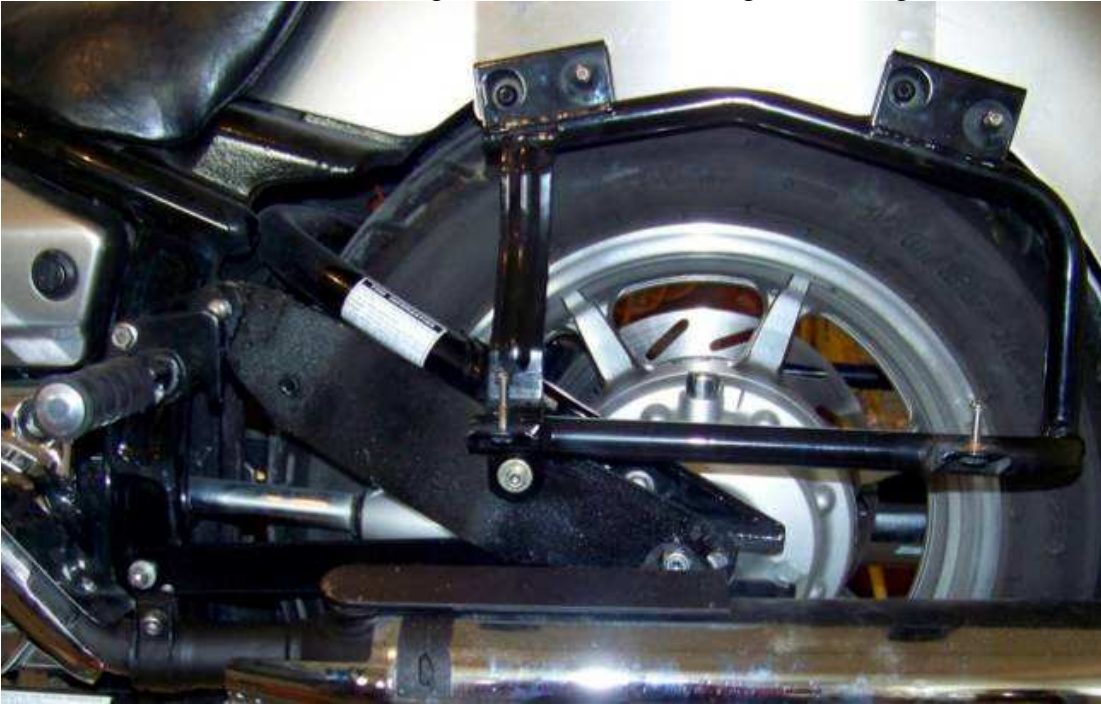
Left side saddlebag bracket attaches to muffler bracket as shown. See also Fig. 26 for finished appearance.
